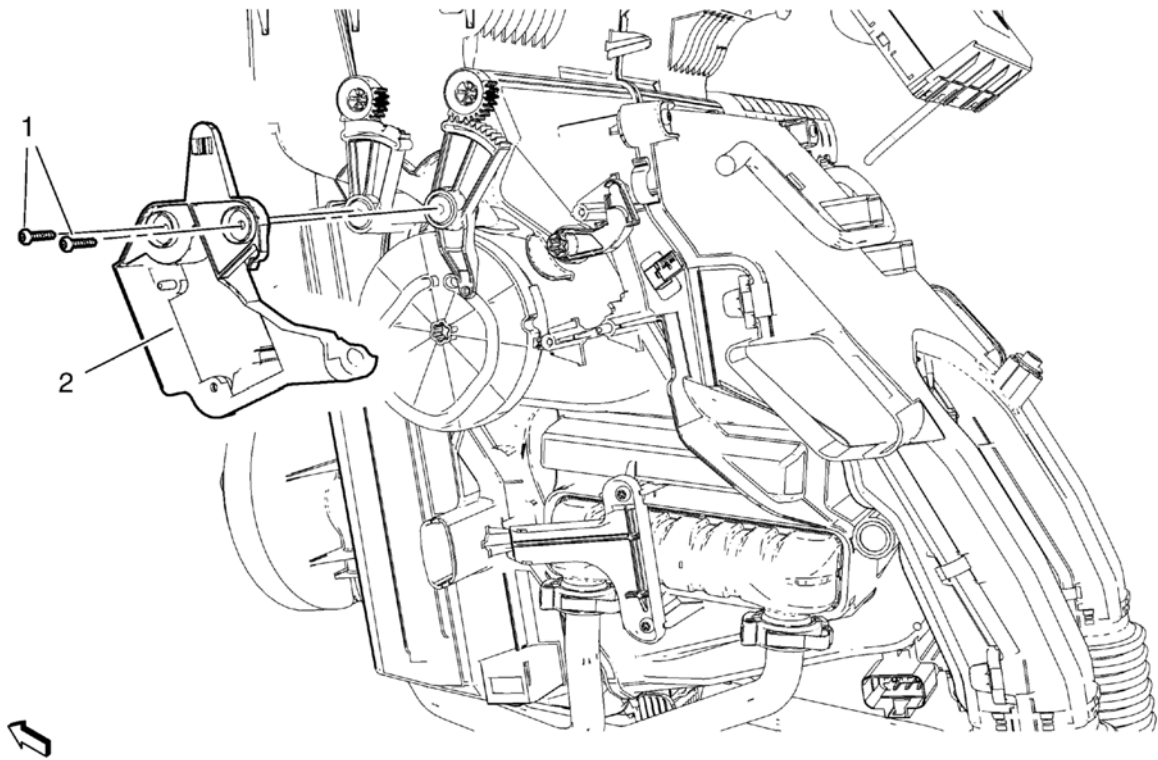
Mode Control Cam Actuator Mounting Plate & Bolts
